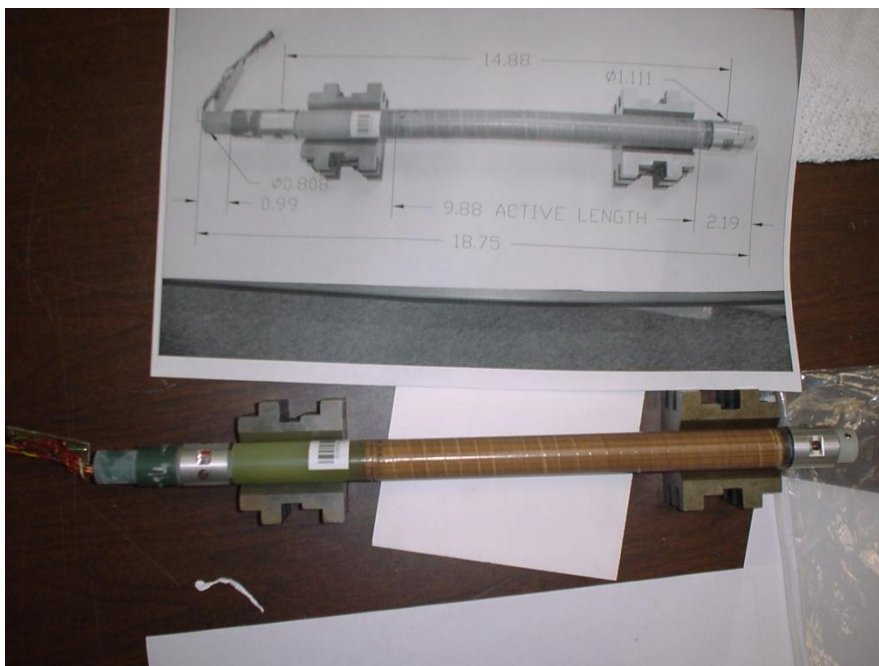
Photo of the 25 cm tangential coil probe and drawing with dimensions.
